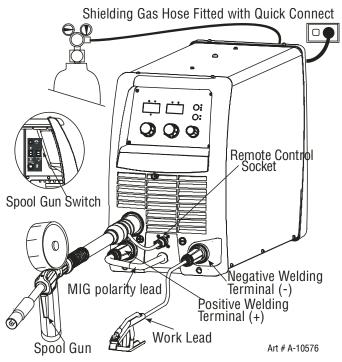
Setup for Spool Gun Welding with Gas Shielded MIG Wire
